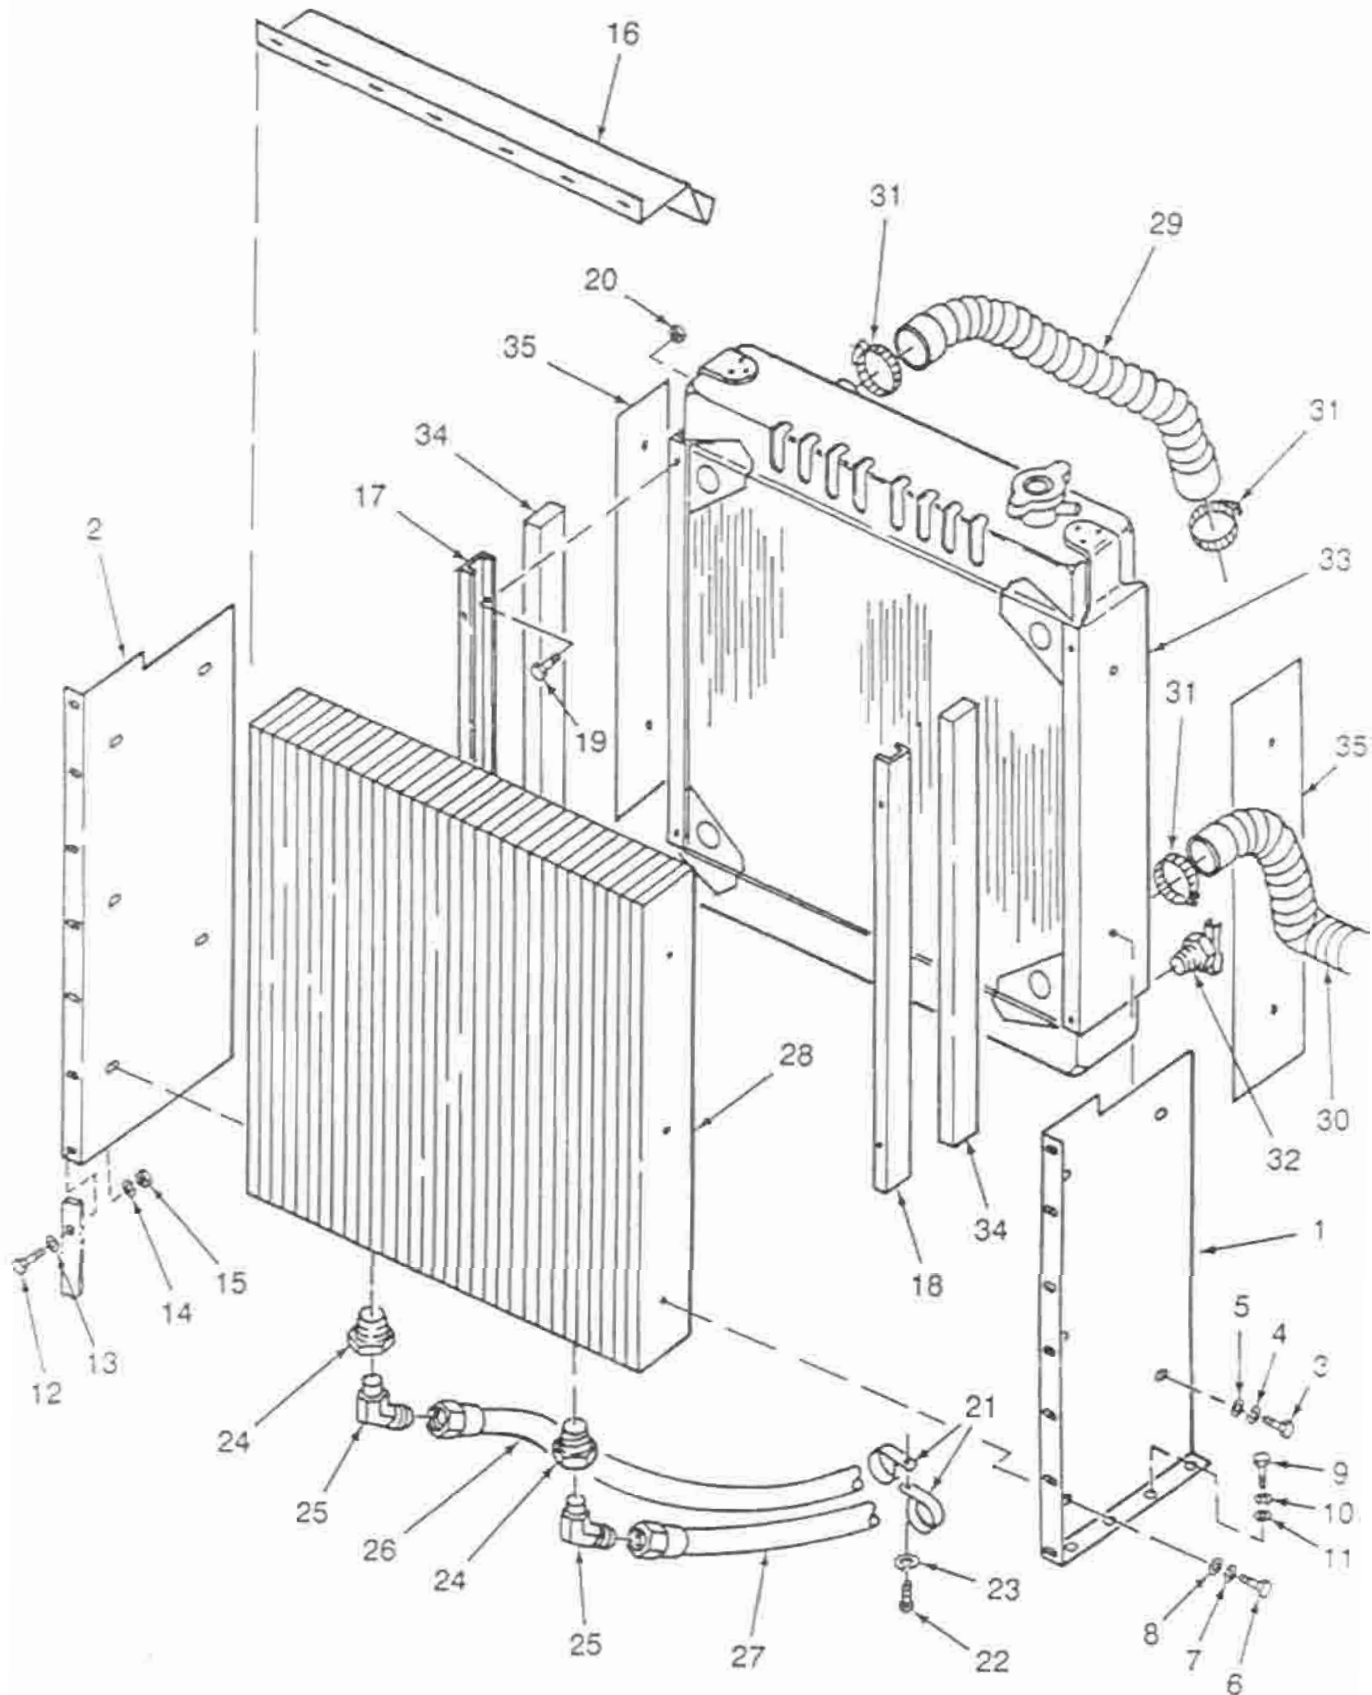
Radiator And Oil Cooler Mounting Group (Sheet 1 of 2)
